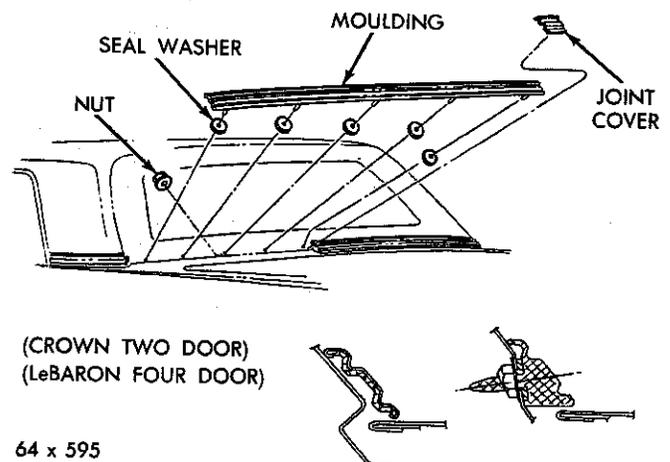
Quarter Panel Moulding Attachment (Imperial)
